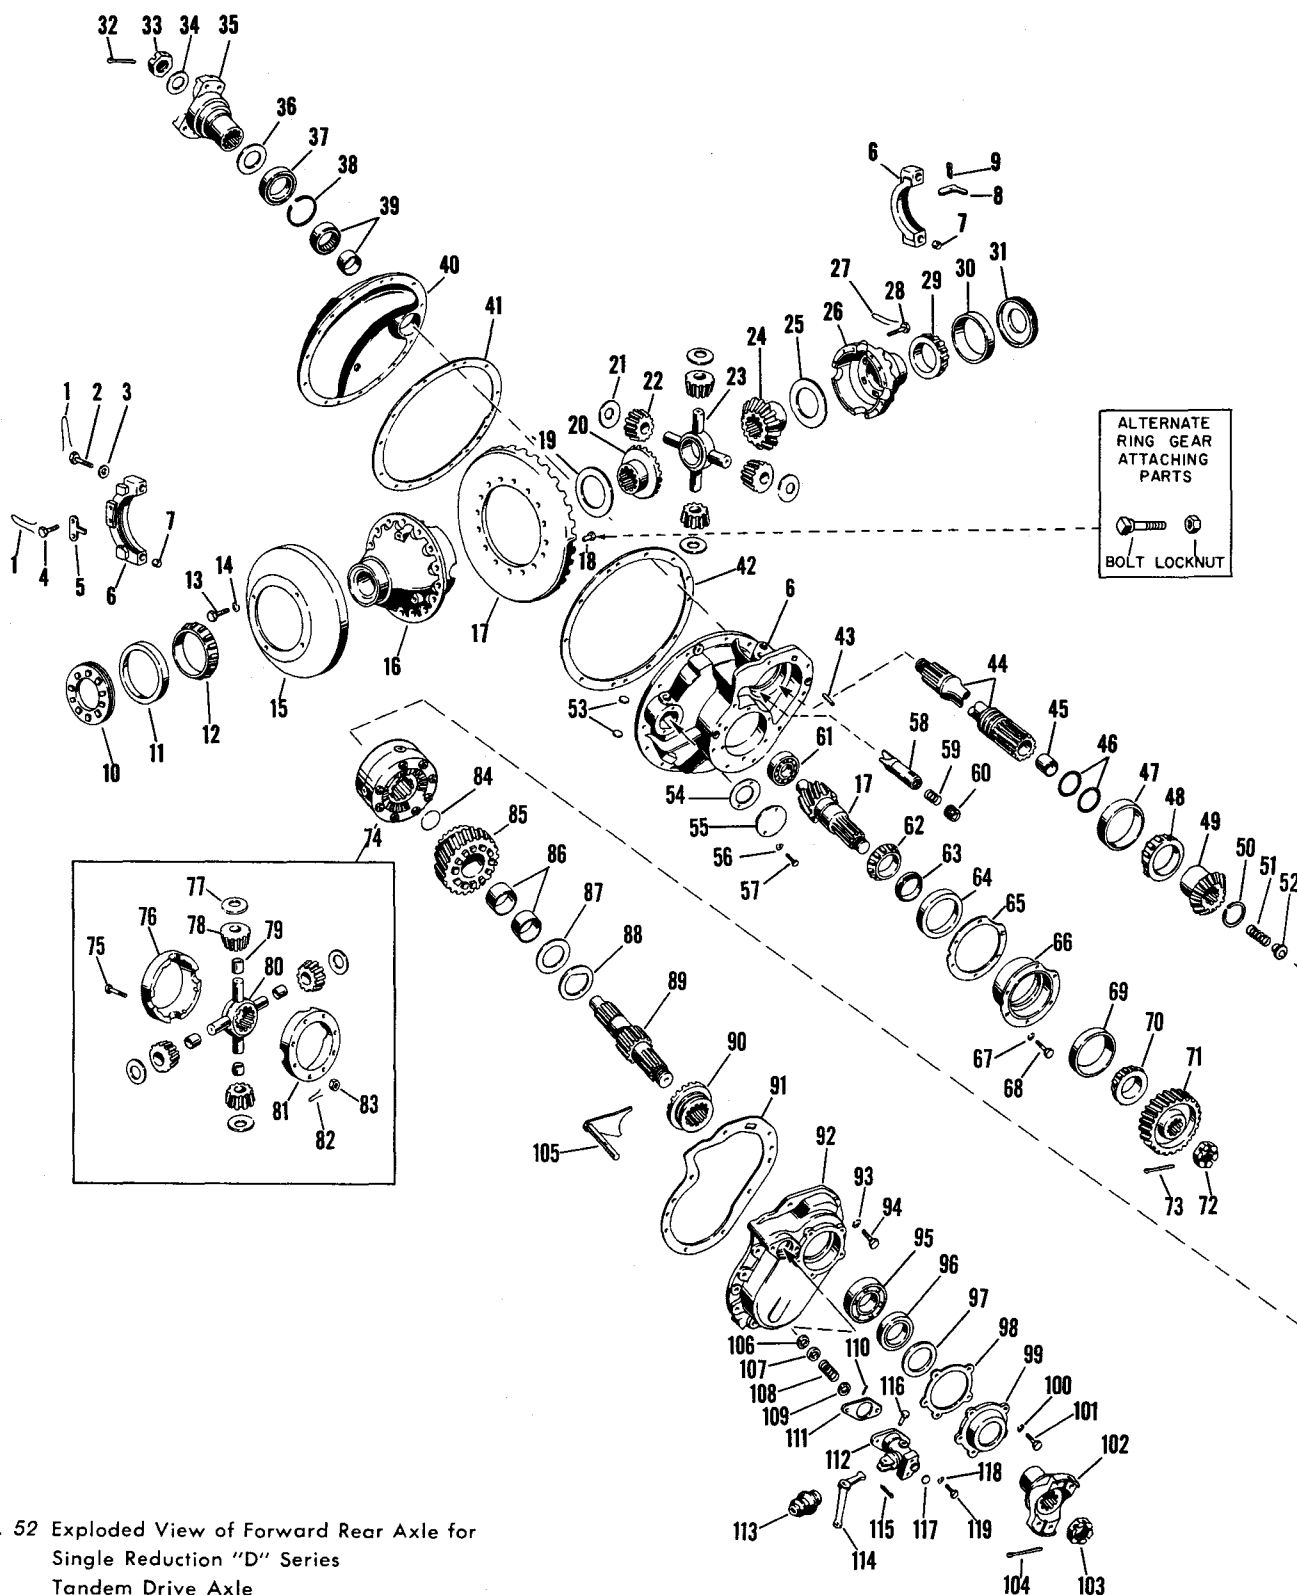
Exploded View of Forward Rear Axle for Single Reduction "D" Series Tandem Drive Axle
